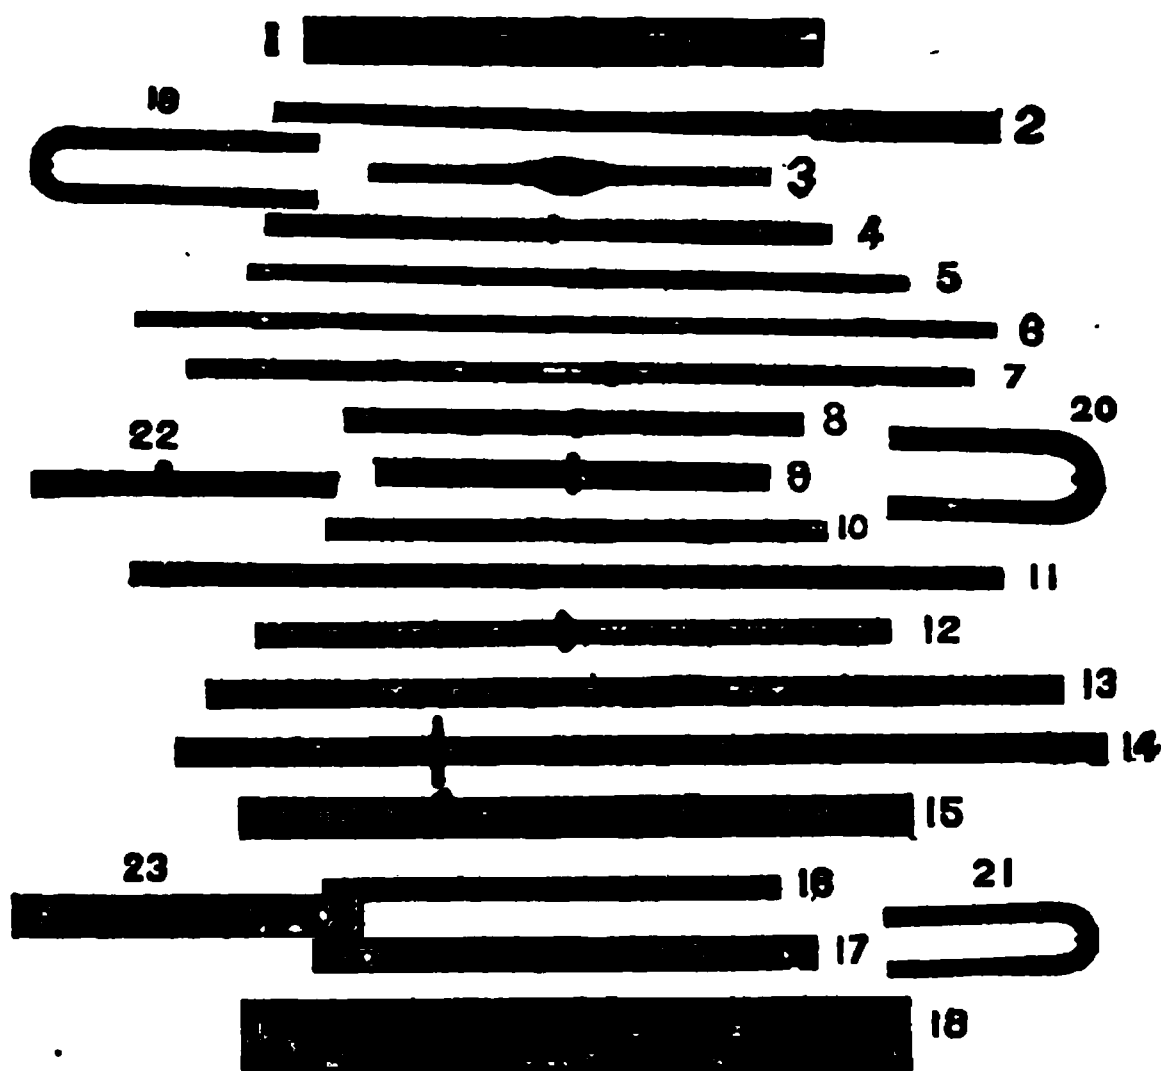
Some Specimens of End-to-End Electrically Welded Joints.
